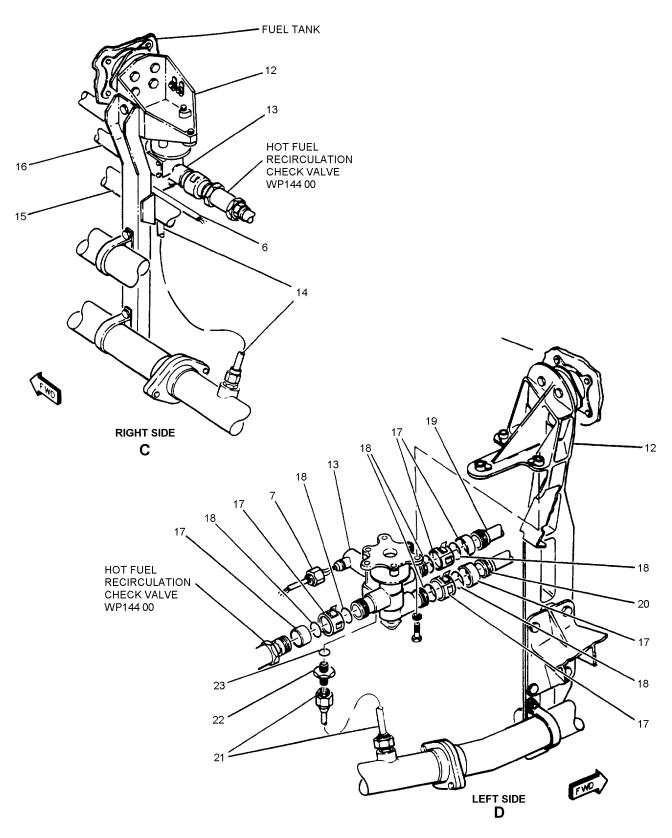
Fuel Diverter Valve (5L-P119 or 5L-R118) (Sheet 3)
